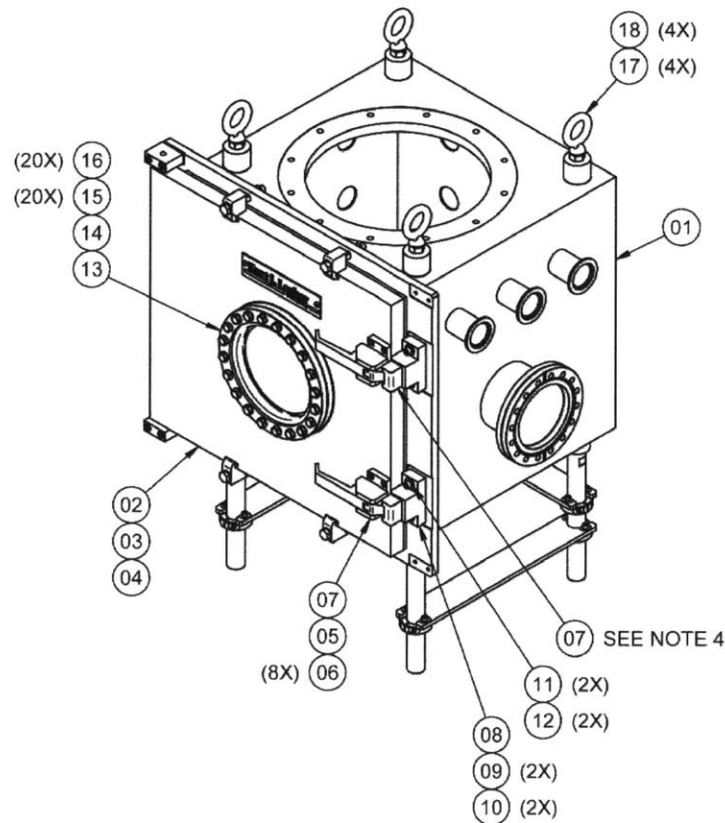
oCVD react chamber engineering drawing—bill of materials.
